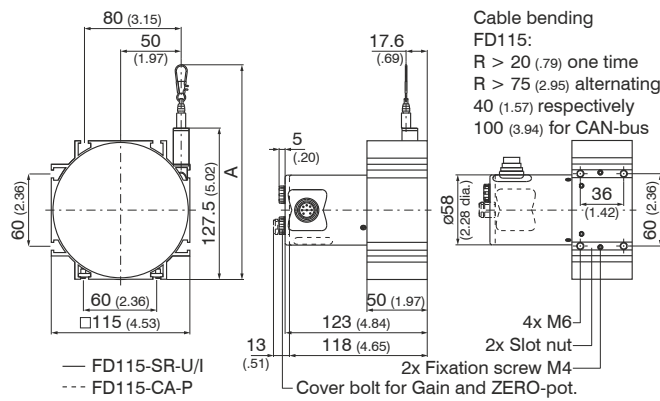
Dimensional drawing ... - FD115 - U/I/P, measuring ranges 3,000 ... 5,000 mm, dimensions in mm (inches), not to scale
